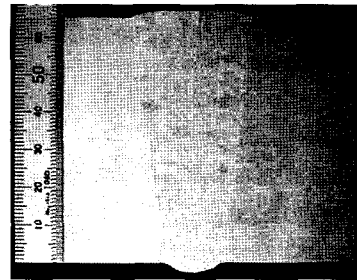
Macro section of through a 65mm thick EGW with 1 pole
